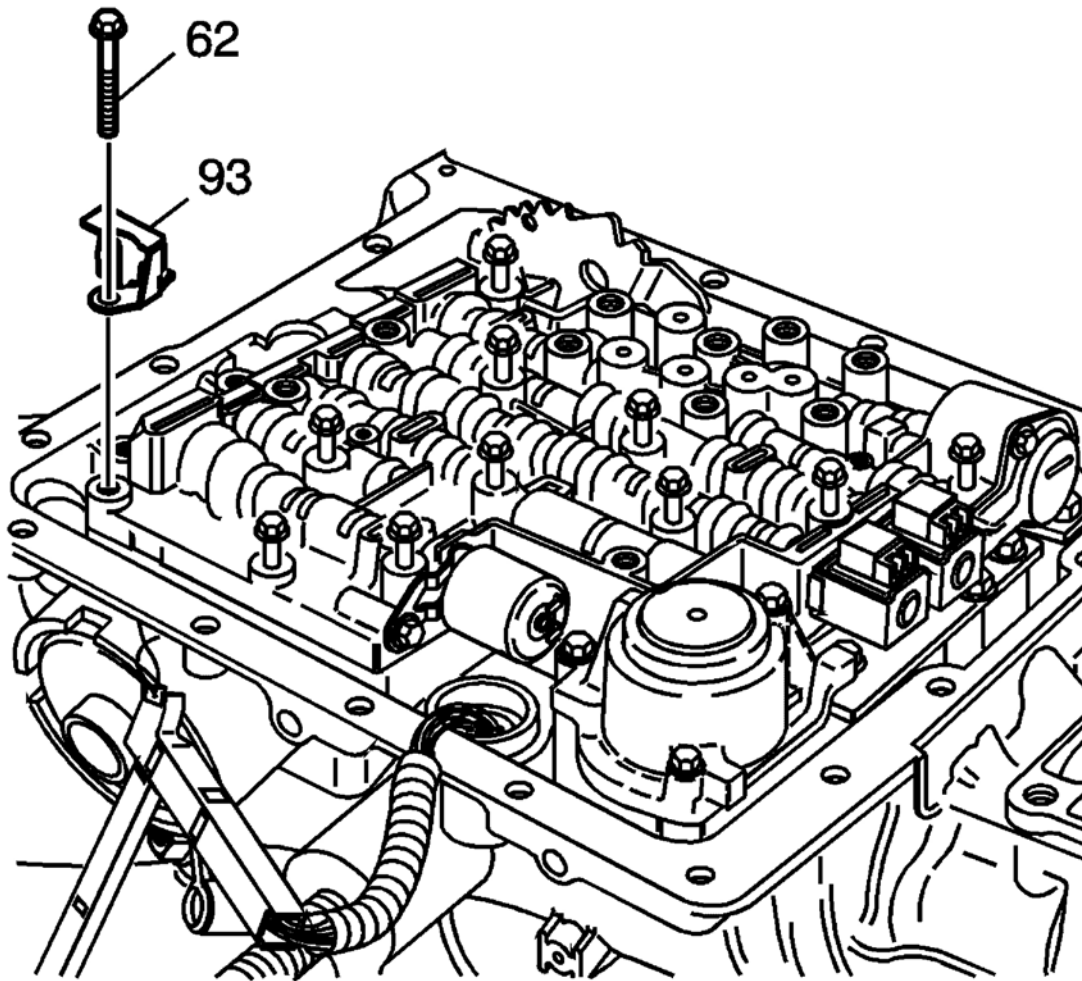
Locating Fluid Level Indicator Stop Bracket & Valve Body Bolts
